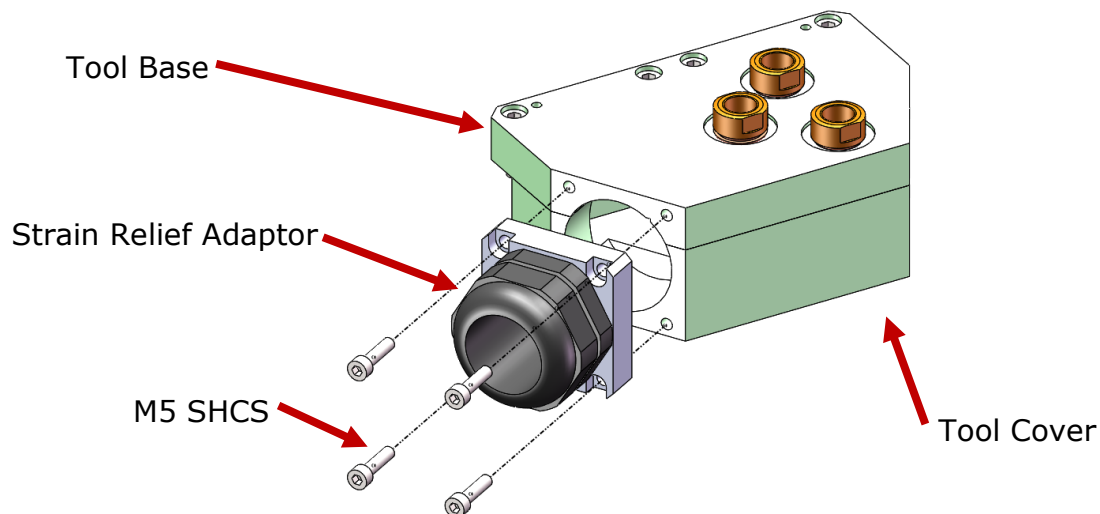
Remove/Install Strain Relief Adaptor
